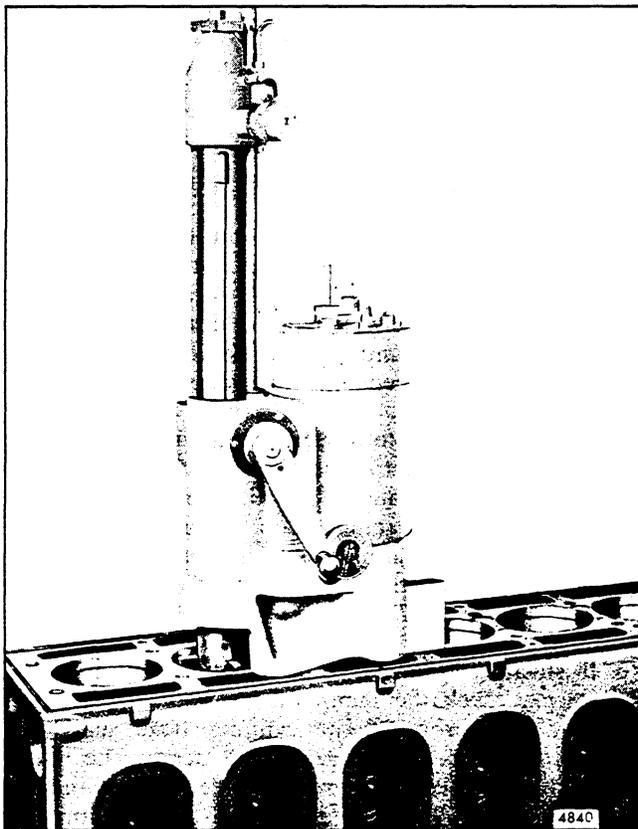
Boring Cylinder Block with Portable Boring Bar
